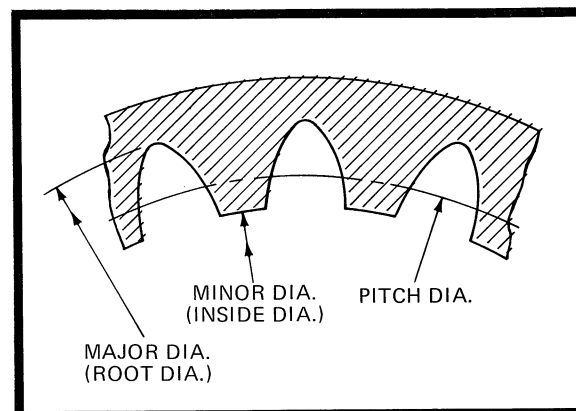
Internal gear teeth protrude inwardly from the inside diameter of a ring.
